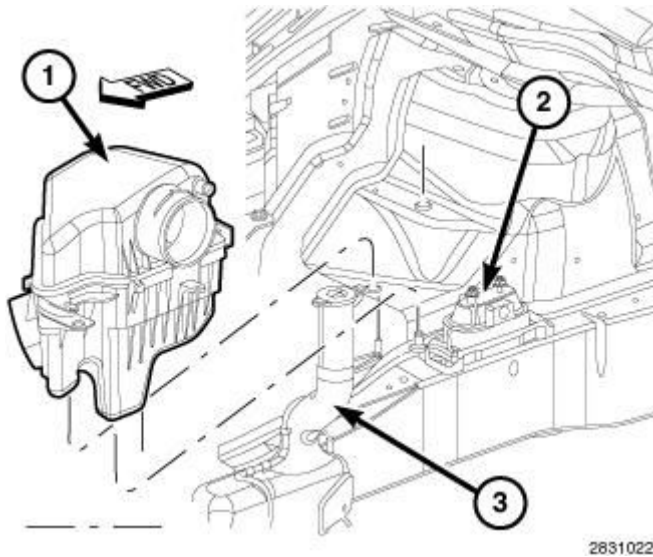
Air Filter Housing Assembly & Right Side Engine Mount Assembly
